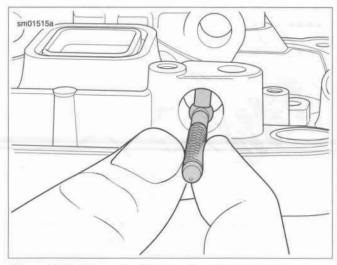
Measuring Rocker Arm Shaft Bore Diameter in Inner Rocker Cover
